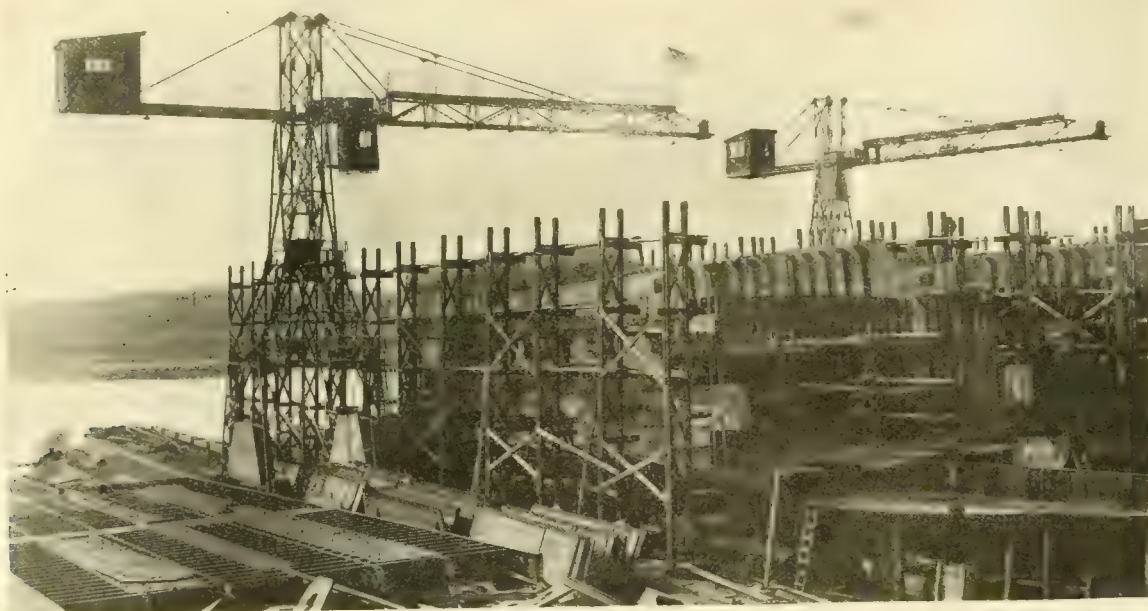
SIX-TON, HAMMER-HEAD TYPE SHIP-BUILDING CRANE
